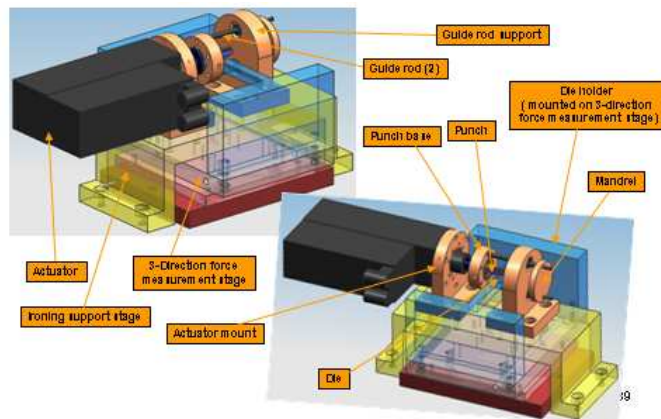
2nd design of the friction testing device in the microextrusion machine
